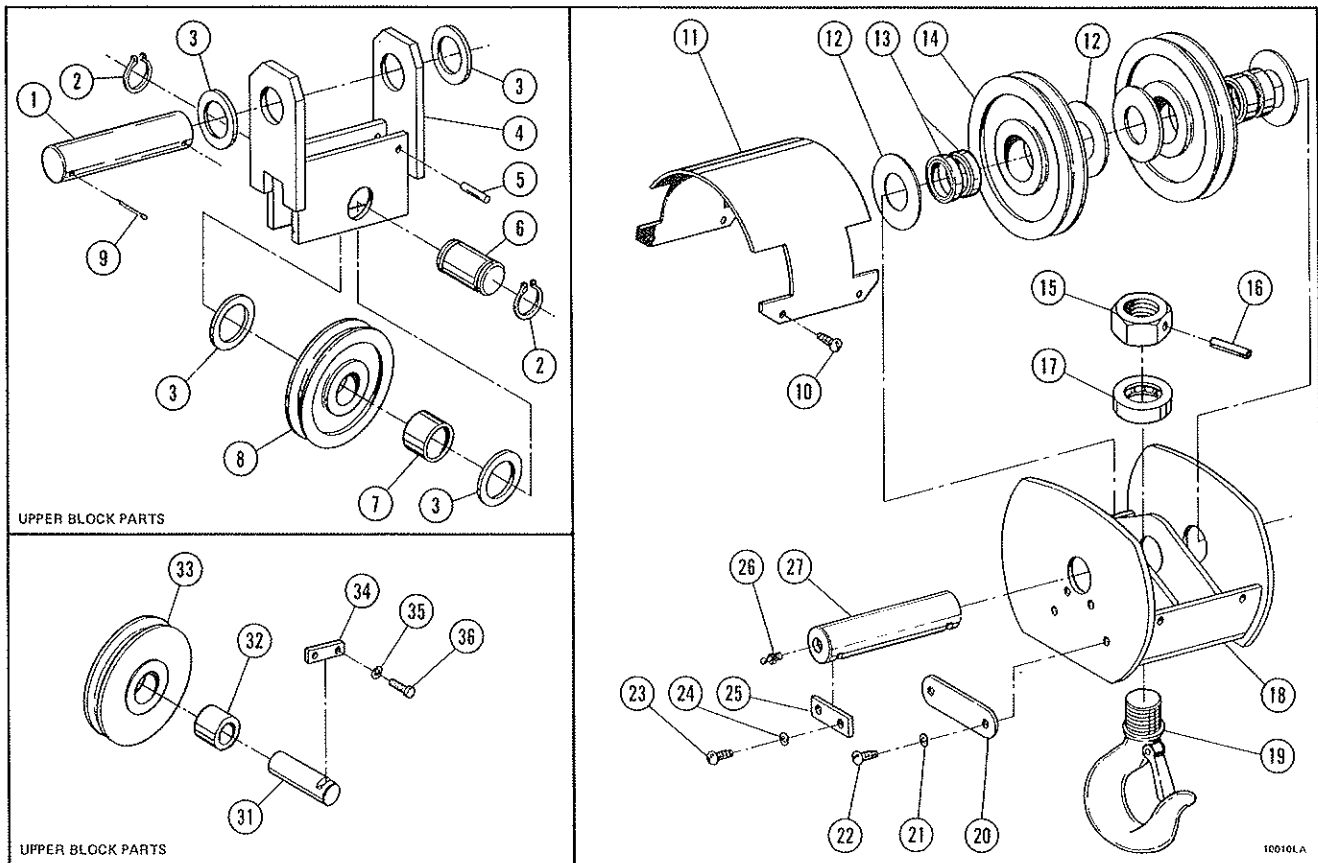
Upper and Lower Block Parts Including Hoist Rope.
